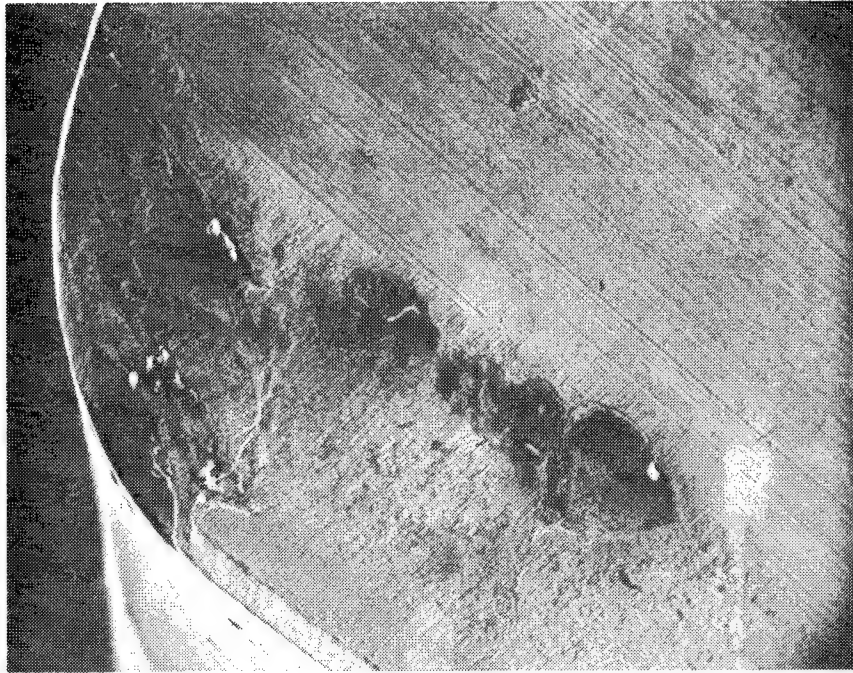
SEM Photograph (80X) of Fluid 0's Milling Test Tool 0-M-1 After Machining 10.5 Cubic Inches of Material.
